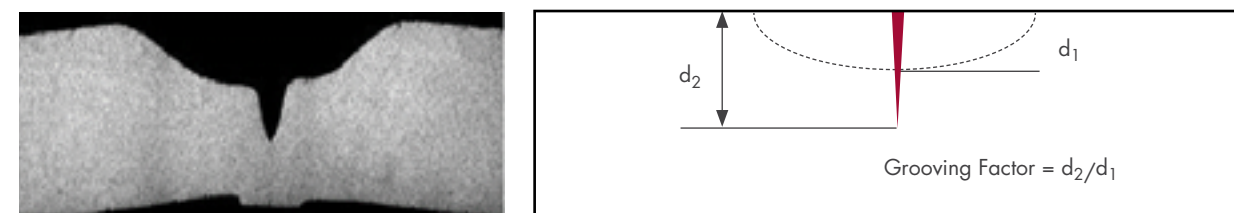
Illustration of ERW/FW Seam Weld with SSWC and Associated Grooving Factor Definition
